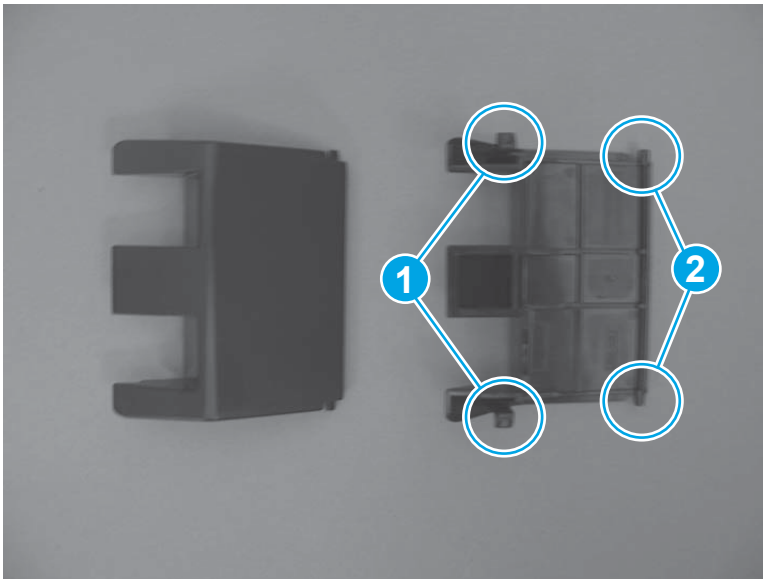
Remove the bin cable guide cover (5 of 6)
